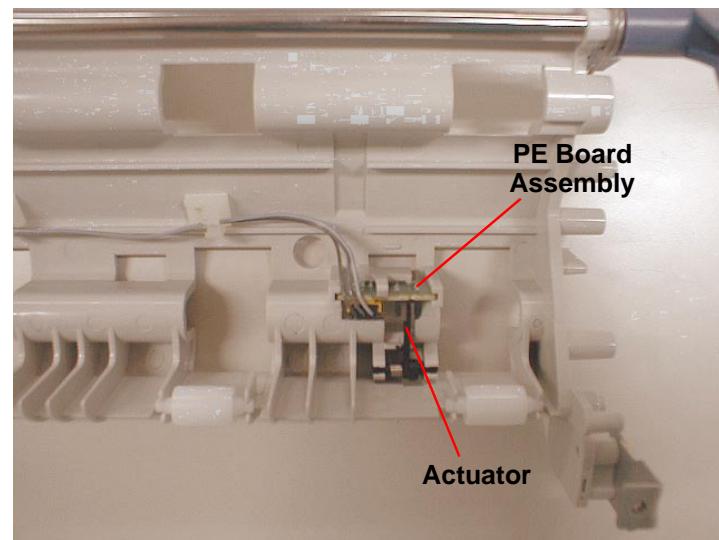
Removing Actuator and PE Board Assembly (2)
